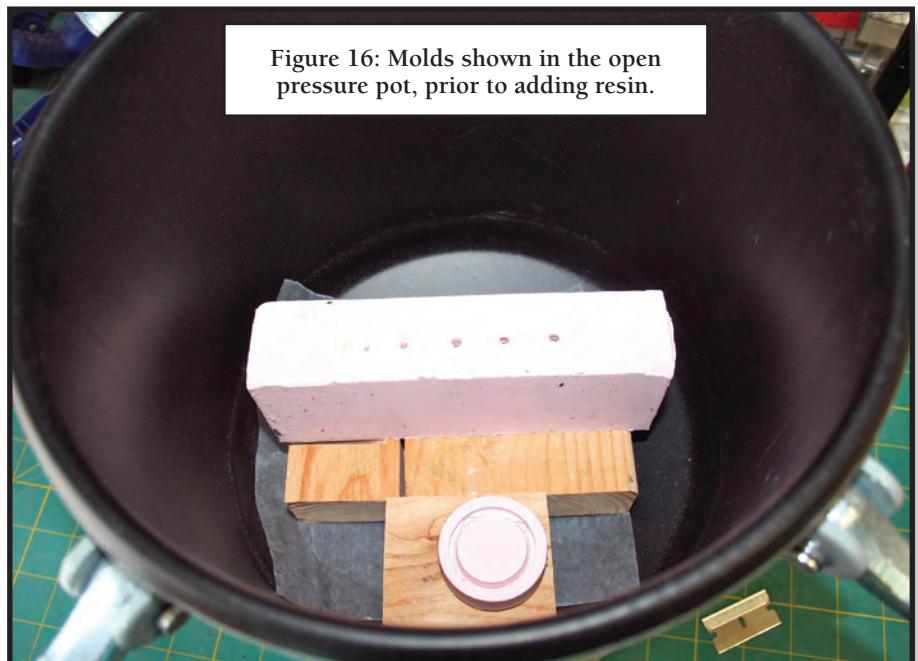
Molds shown in the open pressure pot, prior to adding resin.
